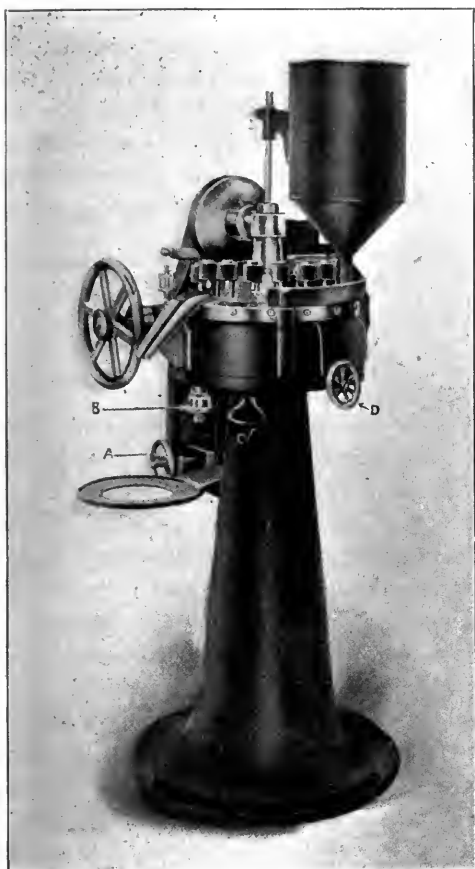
No. 2 rotary tablet machine (Colton Company).
